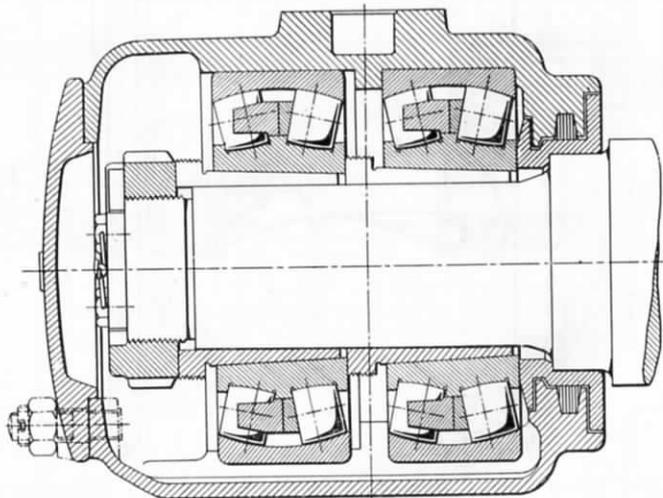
S.K.F. ROLLER-BEARING AXLEBOX FOR OUTSIDE JOURNALS.
